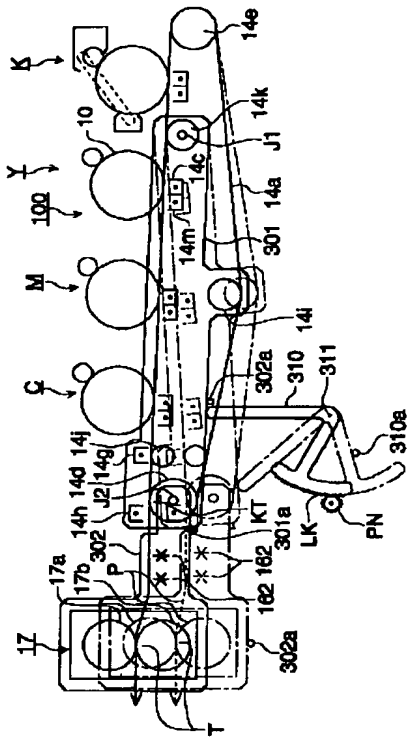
It is drawing showing other examples of movement of an imprint material guidance means.
